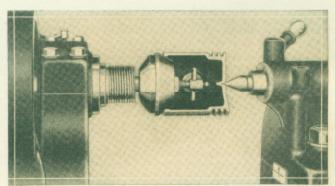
Cross Section of Piston Mounted on a No. 44 Piston Adapter
